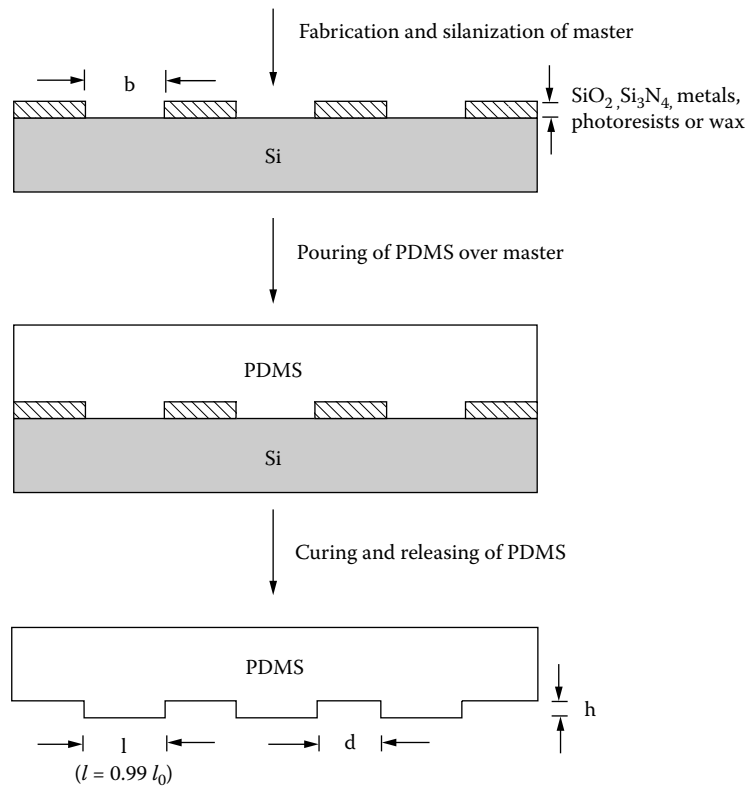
shows the process of forming a PDMS molding using PDMS as a molding that can be used in microfluidic systems. To convert the fabrication of PDMS molding to manufacturing PDMS moldings, the future manufacturing of these moldings will require the development of injection molding and hot embossing techniques. Hot embossing is a technique that is rapidly gaining popularity in producing microscale features in thermoplastic materials. The three stages of manufacture involve heating the polymer, embossing the polymer to the shape of the pattern, and de-embossing to produce the molding. The embossing temperature is typically between 50 and 100°C. The overall embossing time is approximately 10 min. Commercial embossing equipment is shown in Figure 14.5.
